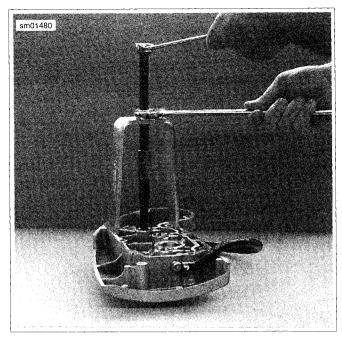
Removing Cam Bushing from Gearcase Cover
